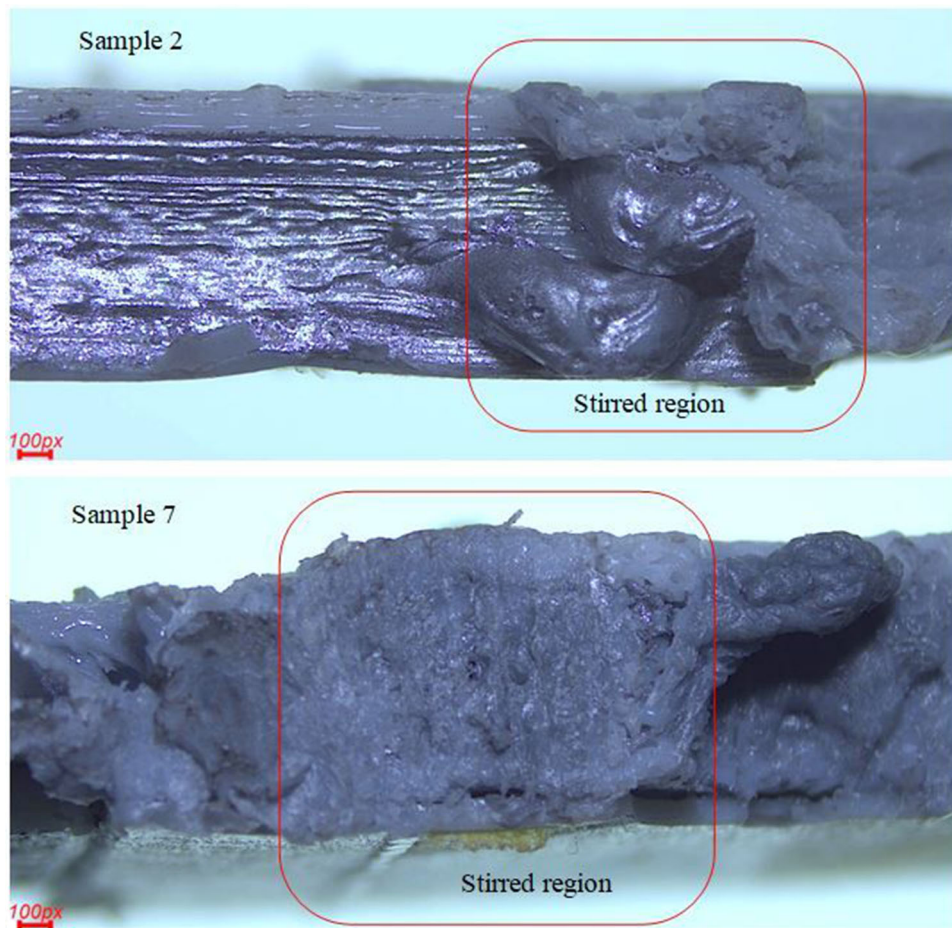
Cross-sectional view of welded (joints) sample 2 and sample 7
